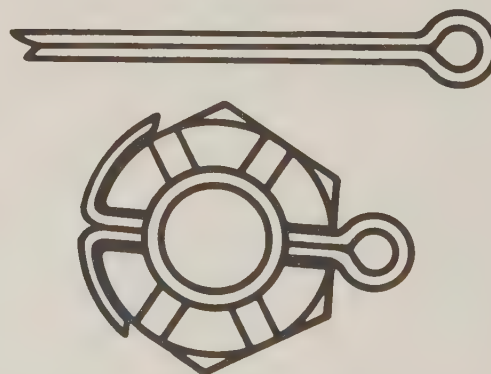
Cotter pin before installation (top) and after installation through the hole in the bolt and the slot in the nut.
